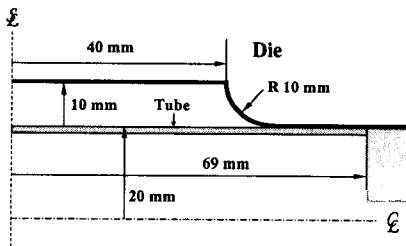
Tooling geometry of the axisymmetric tube hydroforming
